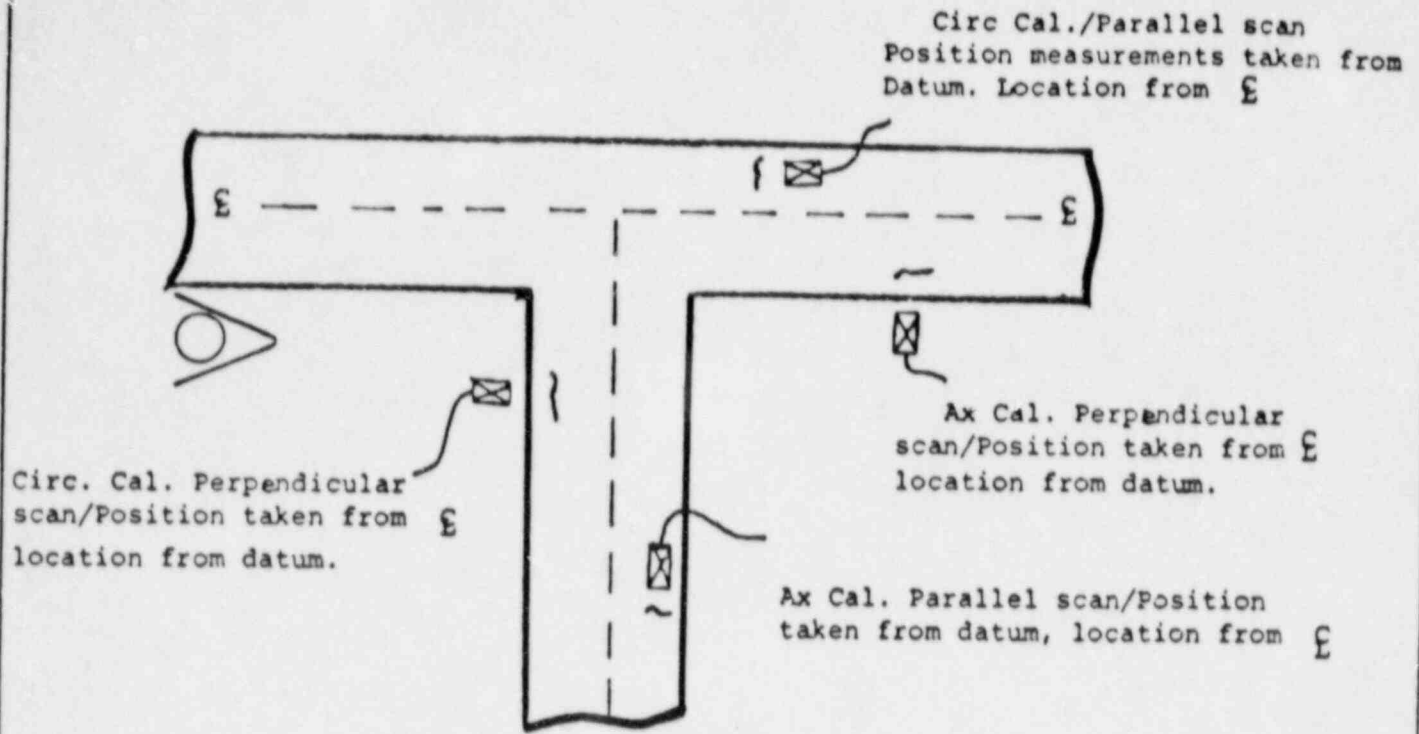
Similar and Dissimilar Metal Welds in Piping
